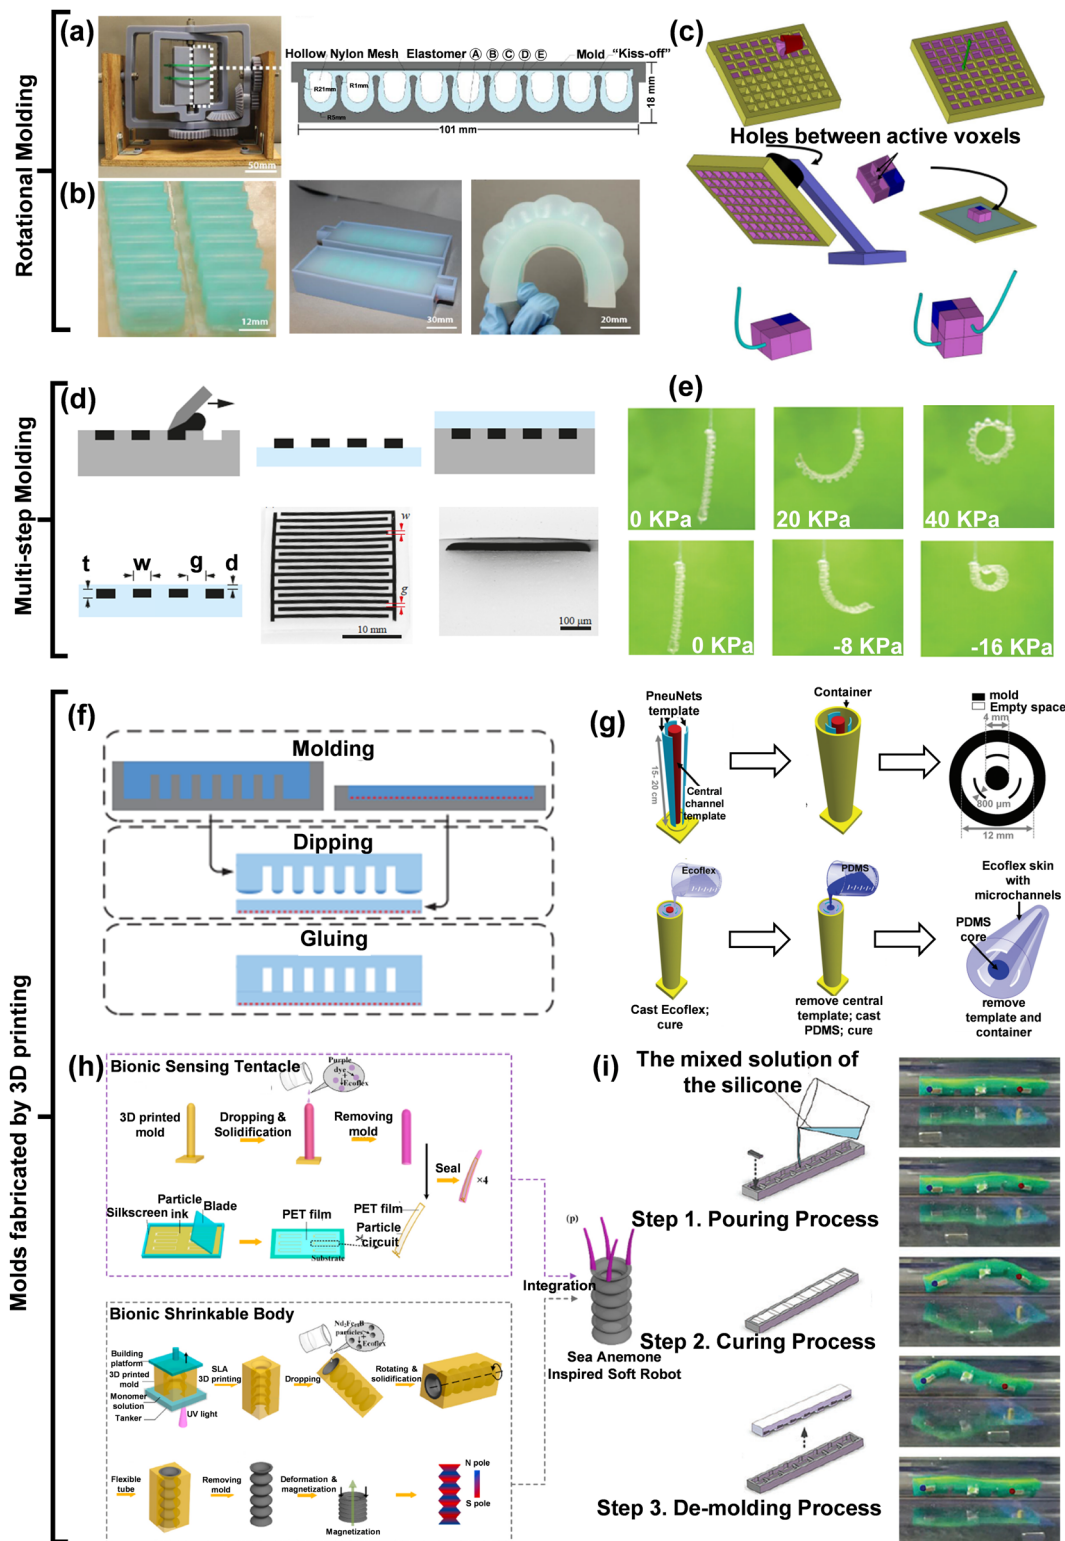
(a) Rotational cast machine and the interior structure of a cuboid soft actuator mold and elastomer coating. (b) Cuboid actuator casting process and finished inflation actuator.⁷⁸ Copyright 2015, Elsevier. (c) Process for manufacturing modular soft robots.⁷⁹ Copyright 2020, IEEE. (d) Schematic of the fabrication process of stretchable electro-adhesion materials for soft robots.⁸⁰ Copyright 2014, IEEE. (e) Experimental results of curling actuators fabricated by molding with positive and negative pressure.³² Copyright 2008, IEEE. (f) Schematic of the fabrication procedure of fluidic elastomer actuator modules.⁸¹ Copyright 2012, IEEE. (g) Fabrication process of the 3D tentacles. Firstly, preparation of the mold by 3D printing, then two different materials are poured into the mold, and finally the 3D tentacle is obtained by demolding.⁸² Copyright 2012, Wiley-VCH. (h) Process for the fabrication of soft robots inspired by sea anemones.⁸³ Copyright 2021, Elsevier. (i) Process for the fabrication of soft robots inspired by worms.⁸⁴ Copyright 2020, Mary Ann Liebert, Inc.
